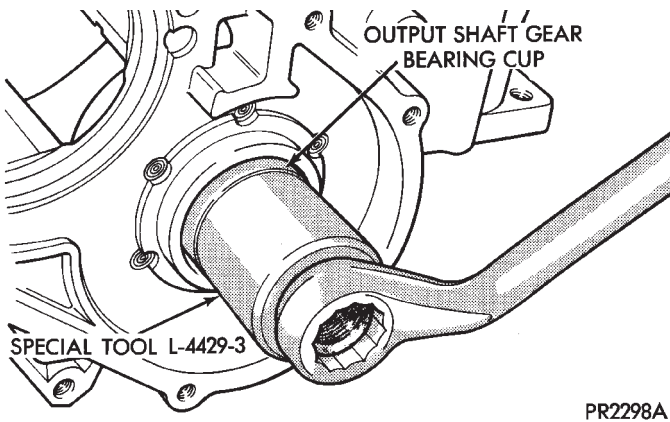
Remove Output Shaft Gear Bearing Cup
